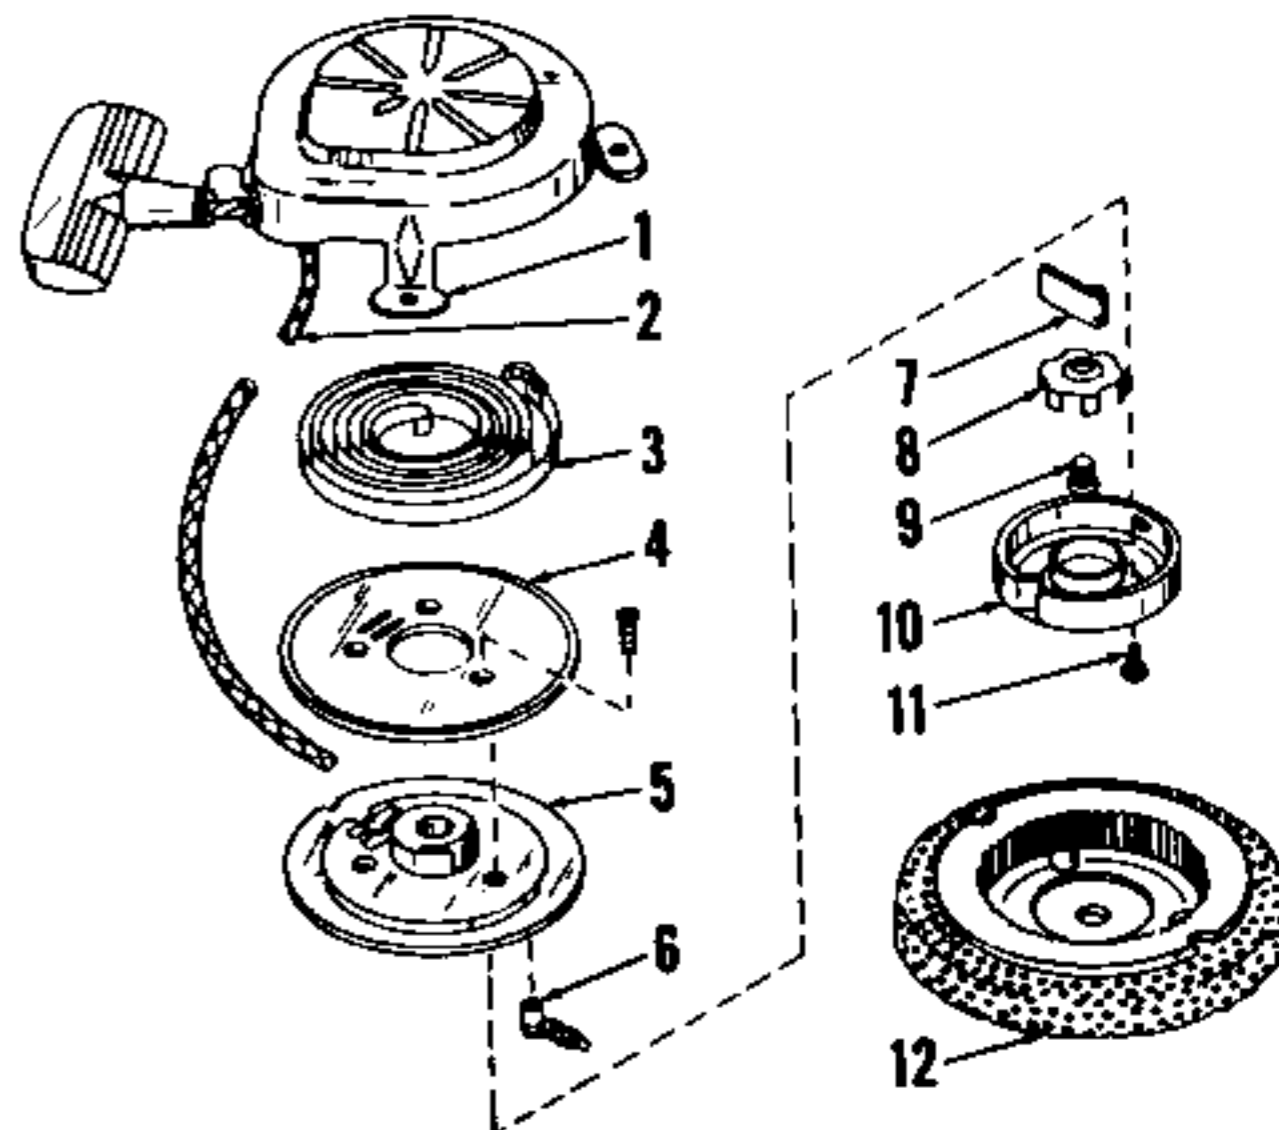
Exploded view of dog type recoil starter used on some models. Refer to Fig. T95 for view of other dog type recoil starter.
